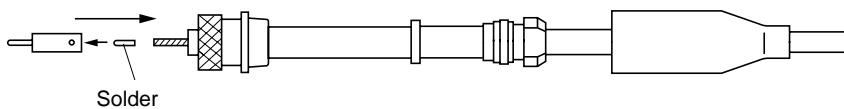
(5) Soldering Pin Contact on Coaxial Cable
